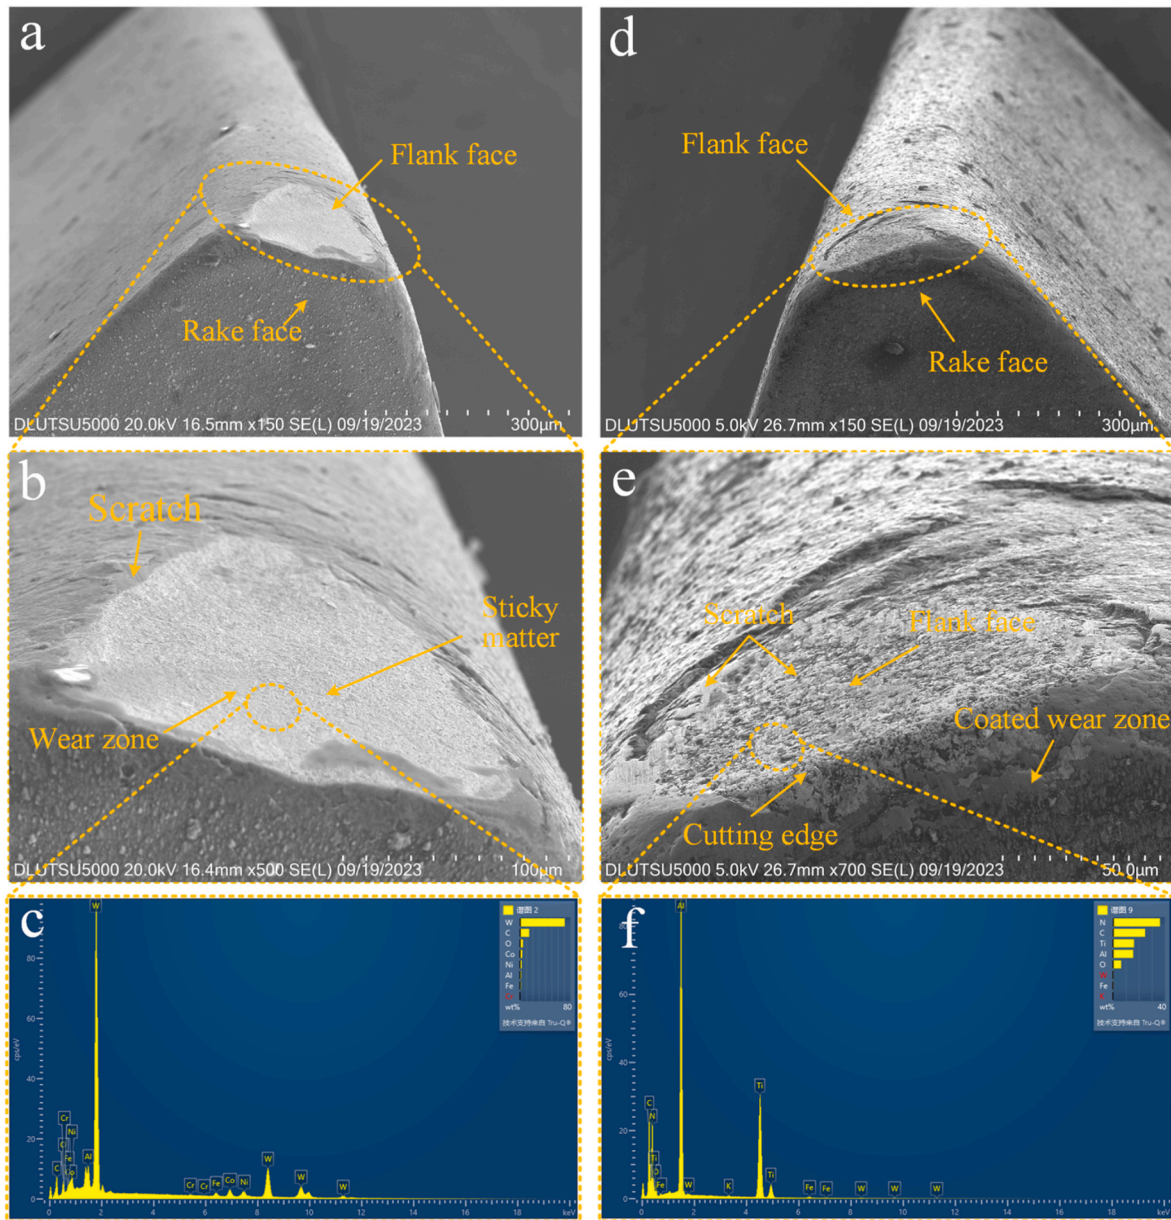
Topography of tool wear: (a) SEM image of worn-out cutting tool by CC; (b) Magnified view of (a), (c) EDS analysis of cutting tools in CC; (d) SEM image of worn-out cutting tool by UEVC; (e) Magnified view of (d), (f) EDS analysis of cutting tools in UEVC.
